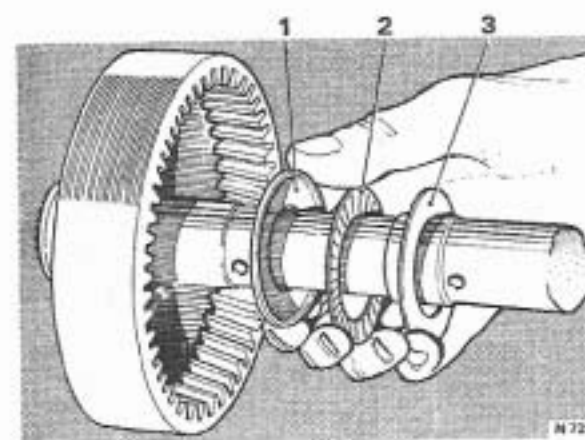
FITTING RACES AND THRUST BEARINGS TO INNER FACE OF REAR INTERNAL GEAR
